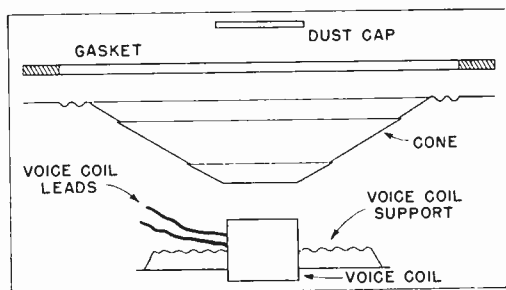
A cone and voice-coil assembly which is put together during the installation of the replacement.
